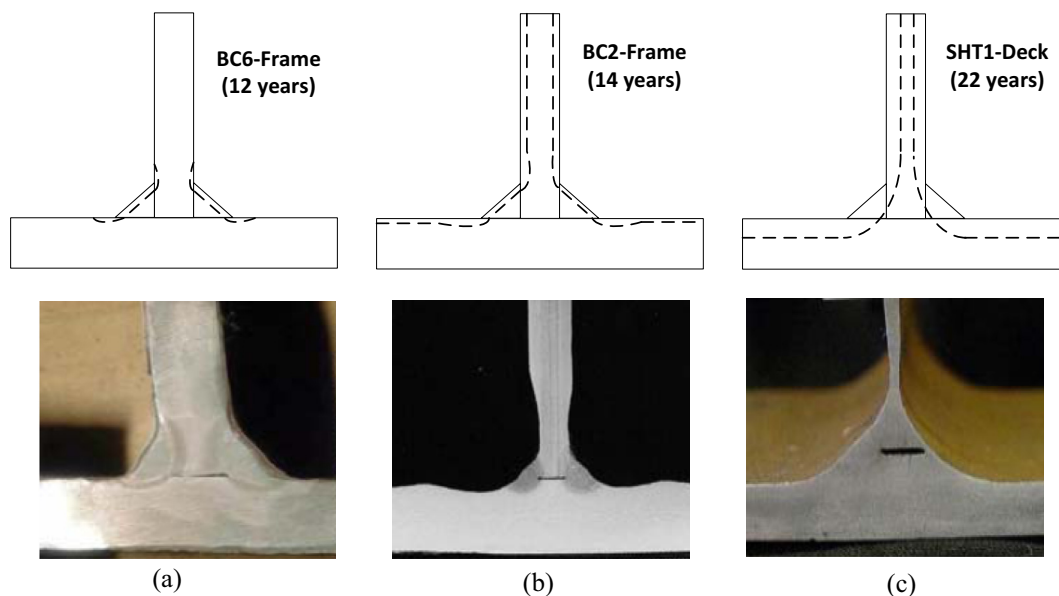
Corrosion of welded joint. (a) BC6-Frame; (b) BC2-Frame; (c) SHT1-Deck.
